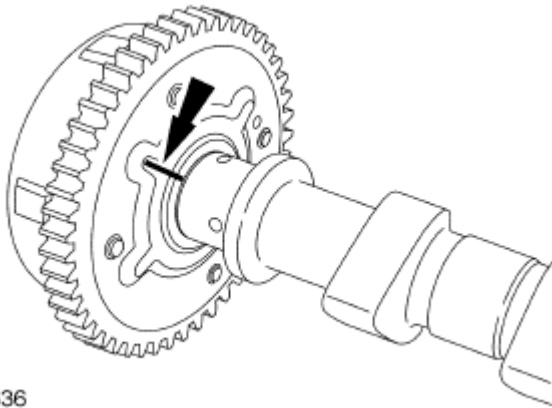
Identifying Sprocket And Camshaft Reference Mark
